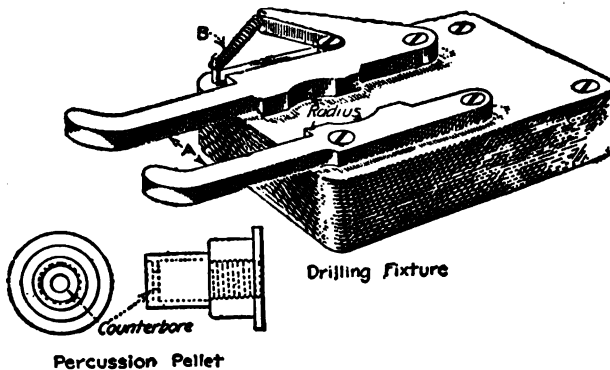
FIXTURE FOR DRILLING SMALL HOLES
